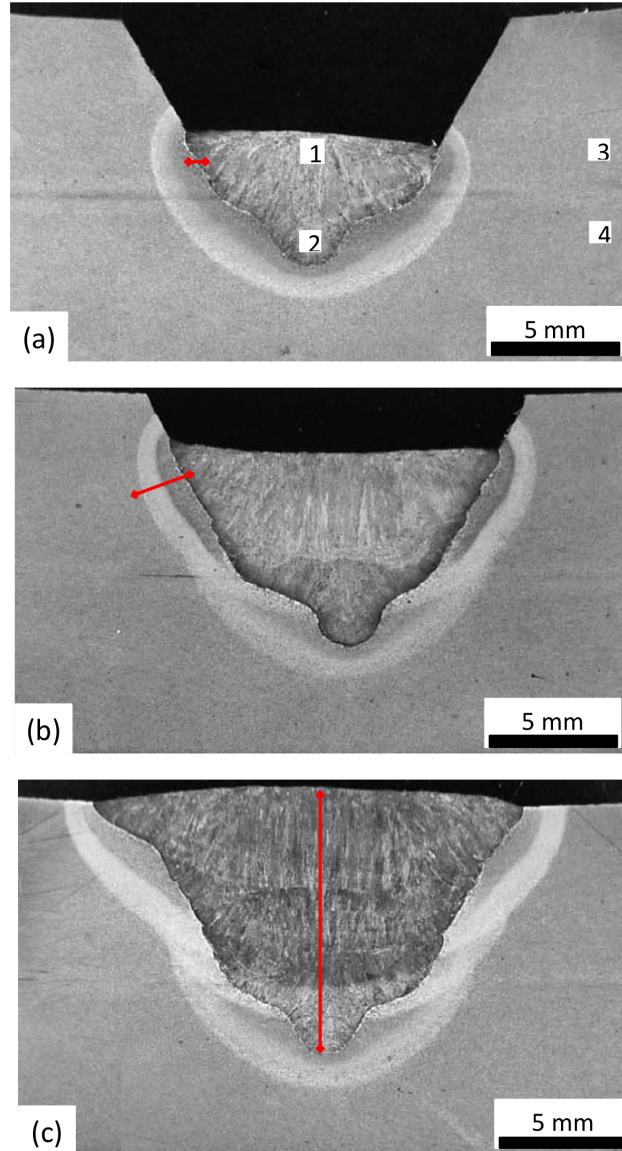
Weld macrostructures; (a) weld A is a 1-pass weld showing the EDX composition measurement positions including the line profile across the fusion boundary (b) weld B is a 2-pass weld, the line corresponds to the microstructural investigation across the HAZ, (c) weld C is a 3-pass weld locating the hardness profile along the weld centreline.
